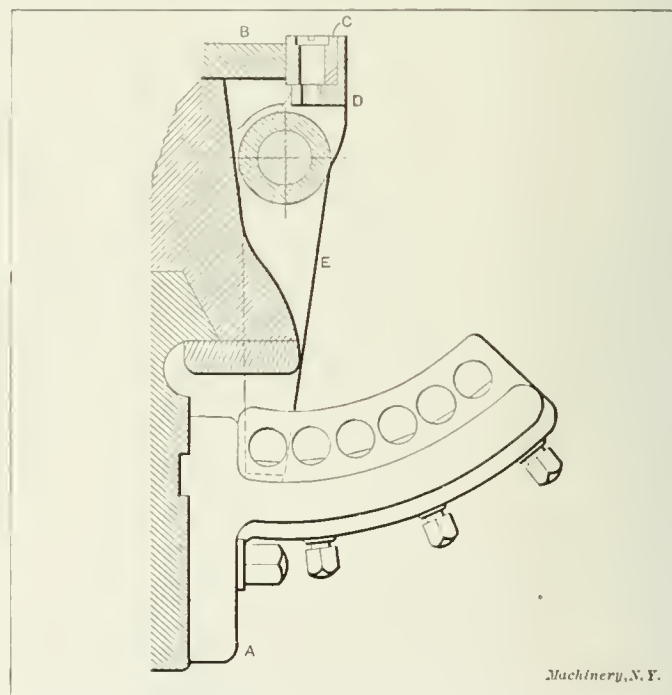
Turret Lathe Stops used on the Pratt & Whitney Turret Lathes
